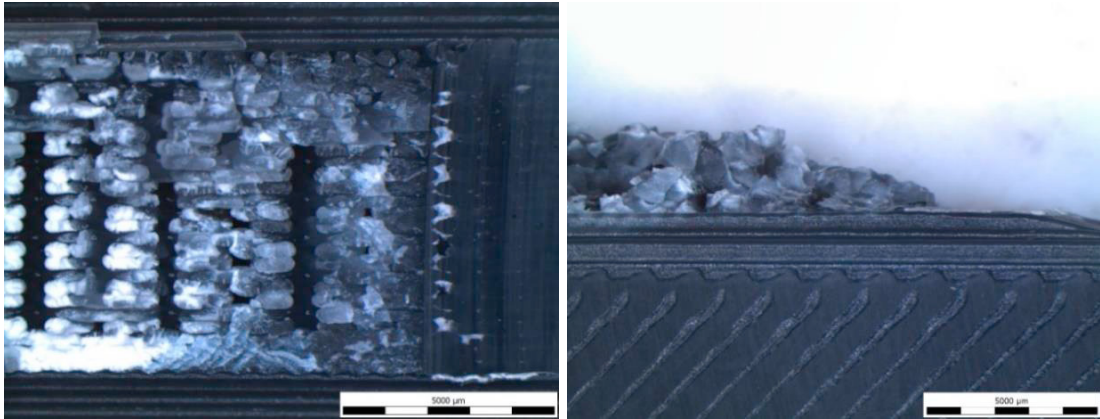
Fracture surface of 0.3 mm regular CT specimen: Top view (Left); Side view (Right).
